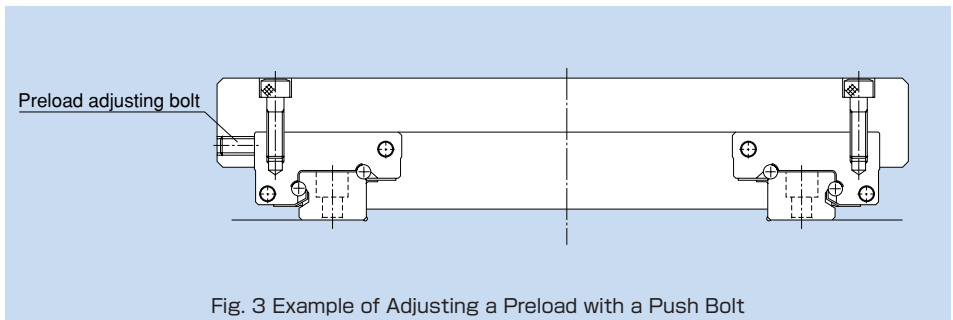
Example of Adjusting a Preload with a Push Bolt
